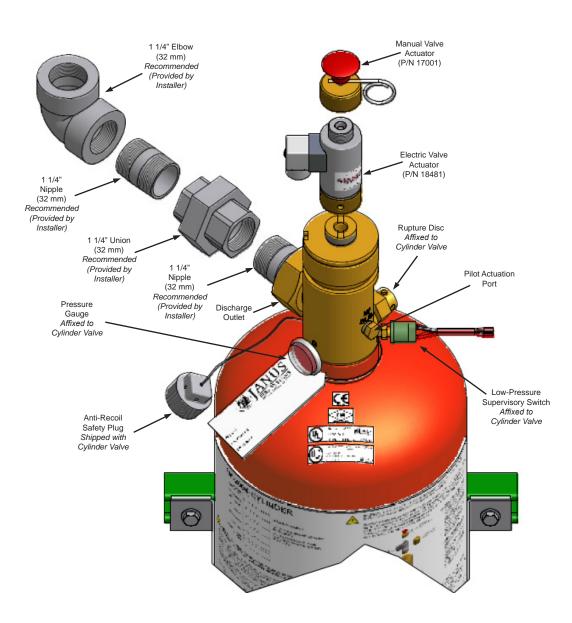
Sv Cylinder Valve w/ Trim Kit
